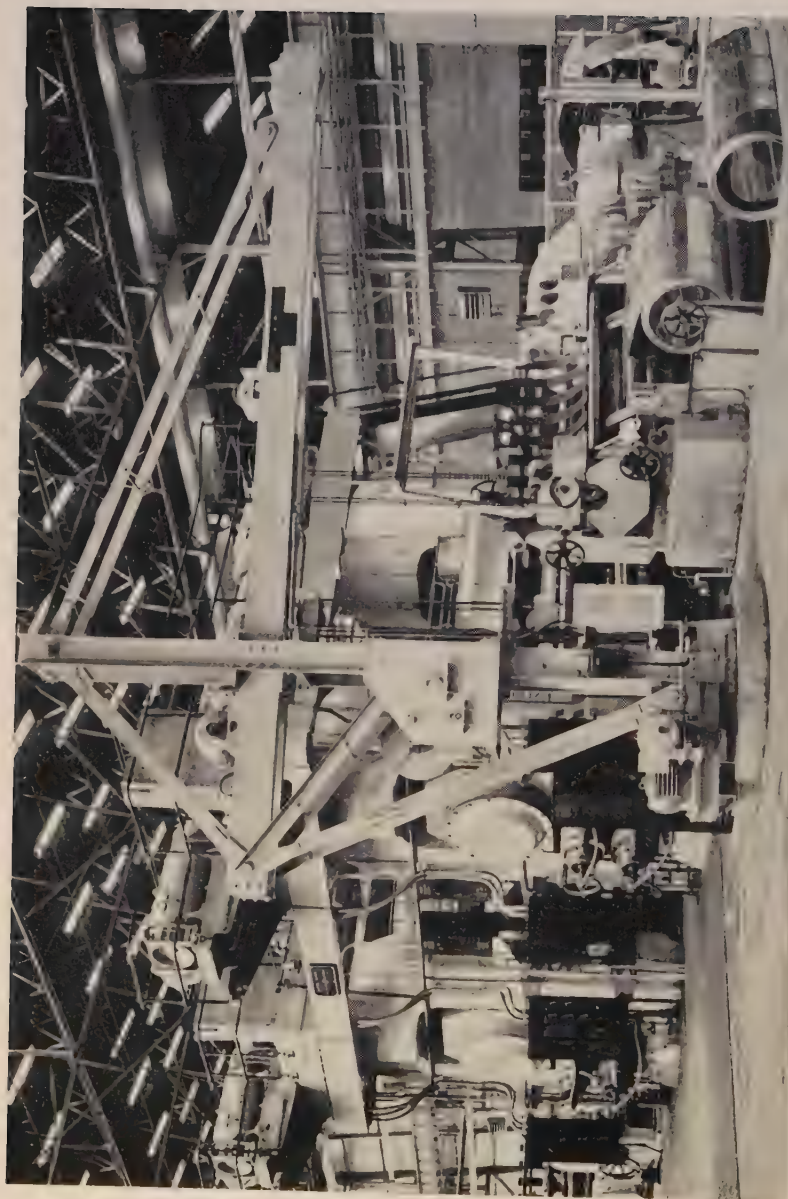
A 20 × 49 × 84 in. Four-High Two-Stand Tandem Cold-Rolling Mill for Wide Aluminium and Light Alloy Strip.
